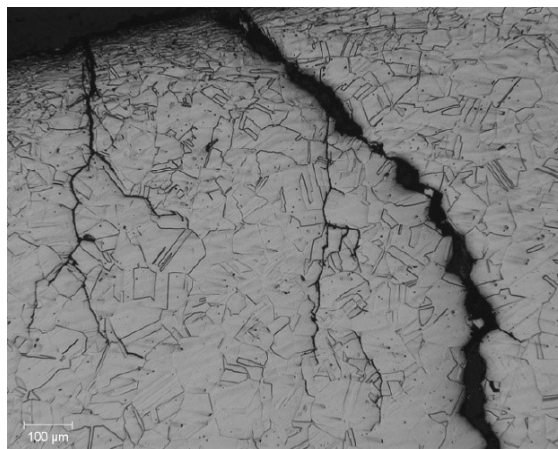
Cl⁻ SCC on the thread surface of a failed 303 SS bolt.
